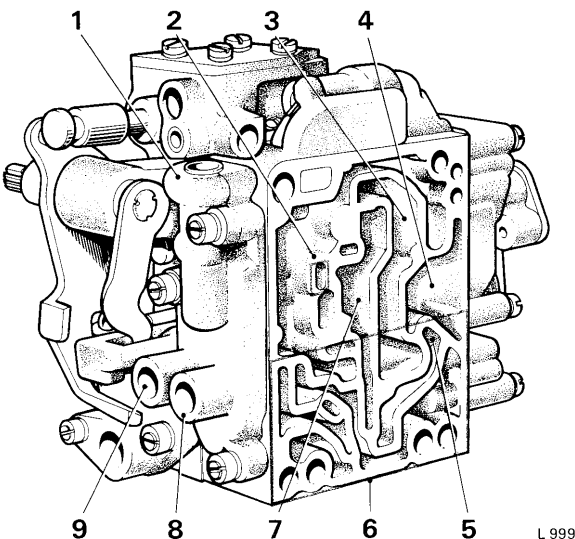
AIR PRESSURE TEST POINTS—CONTROL VALVE UNIT
